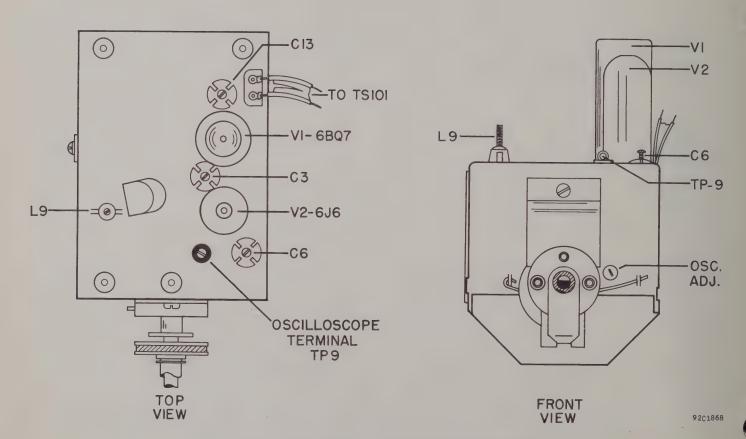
B. 1E1380 Cascode TV Tuner Alignment Adjustments
